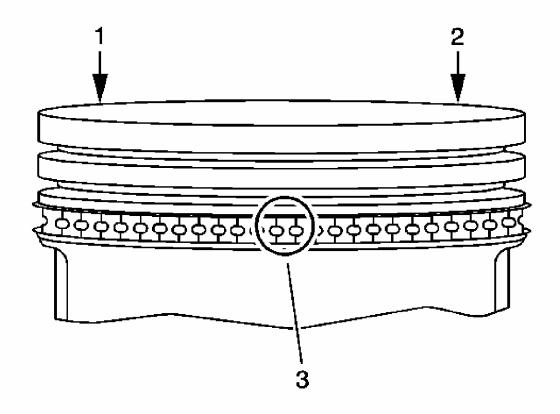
View Of Oil Control Piston Rings Courtesy of GENERAL MOTORS CORP.
